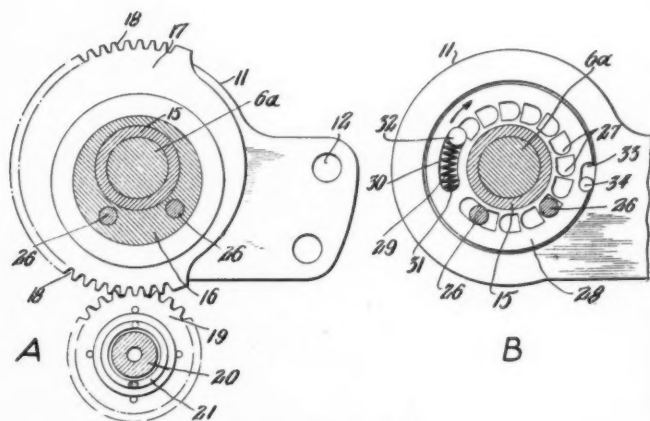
A—Sectional view of Fig. 1 on line 3—3. B—Latch arrangement holds eccentric in place and cushions backward thrusts
